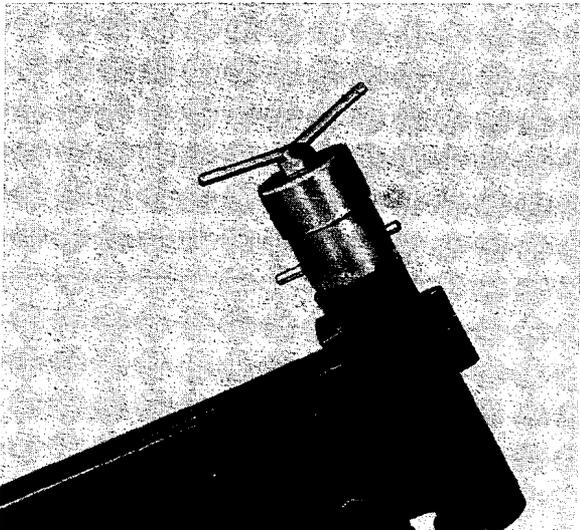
Fitting the screw, tightening it and thus extracting the bearing from the frame
